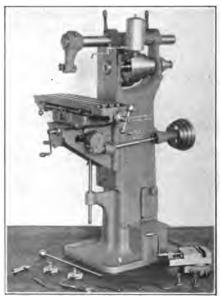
No. 0 Plain milling machine. (Courtesy Brown & Sharpe Mfg. Co.)
